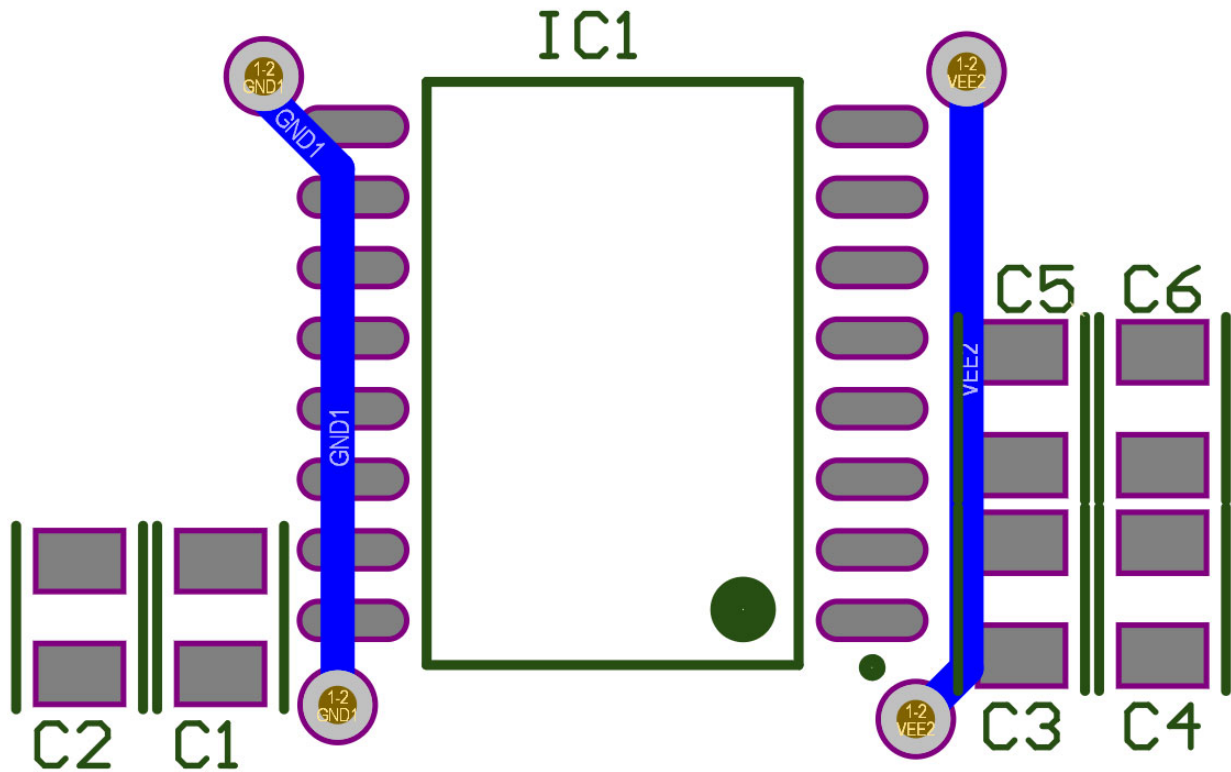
Recommended Basic Bipolar Power Supply PCB Design
